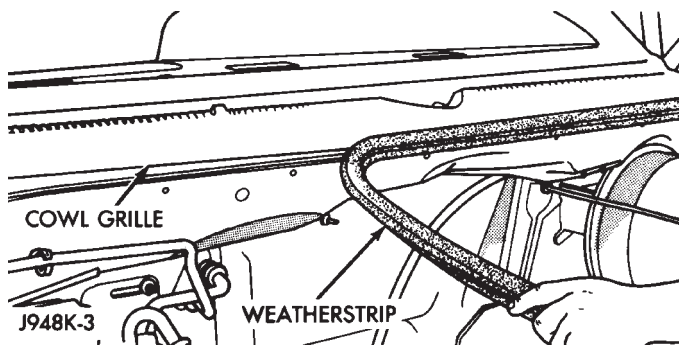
Cowl Plenum Cover/Grille Panel Weatherstrip
